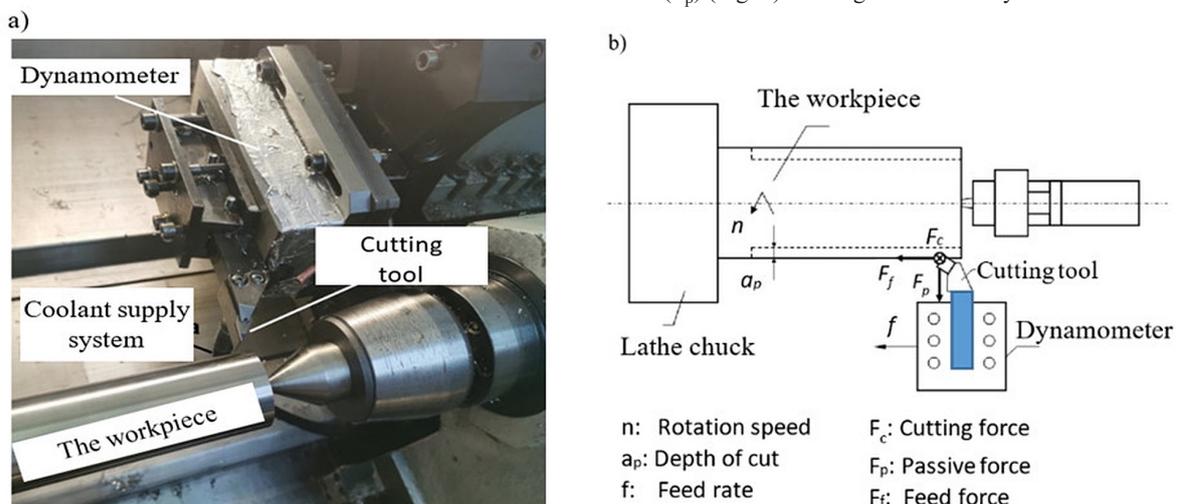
View of the working space of the NEF600 lathe: a) fixing the cutting tool in the dynamometer; b) kinematic diagram of the stand
